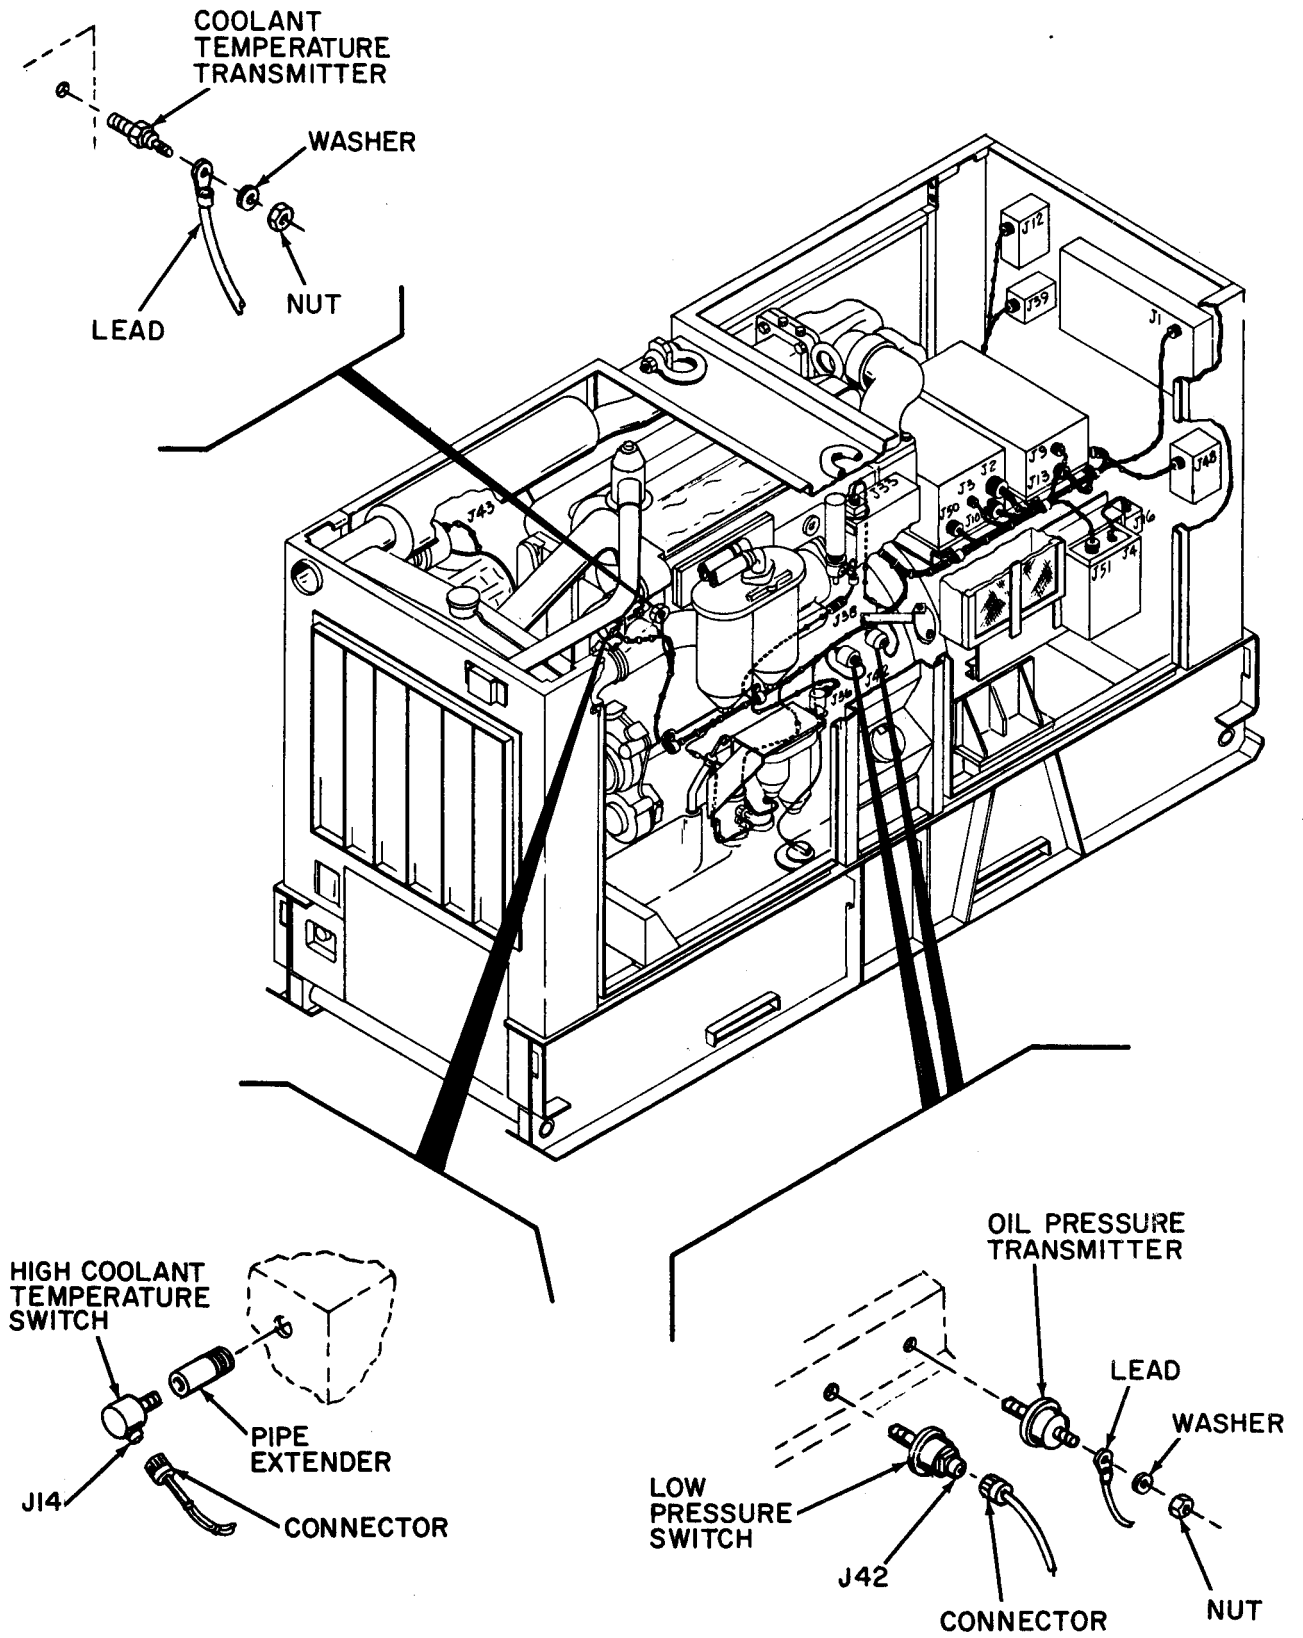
Engine electrical control elements, removal and installation (sheet 1 of 2)
